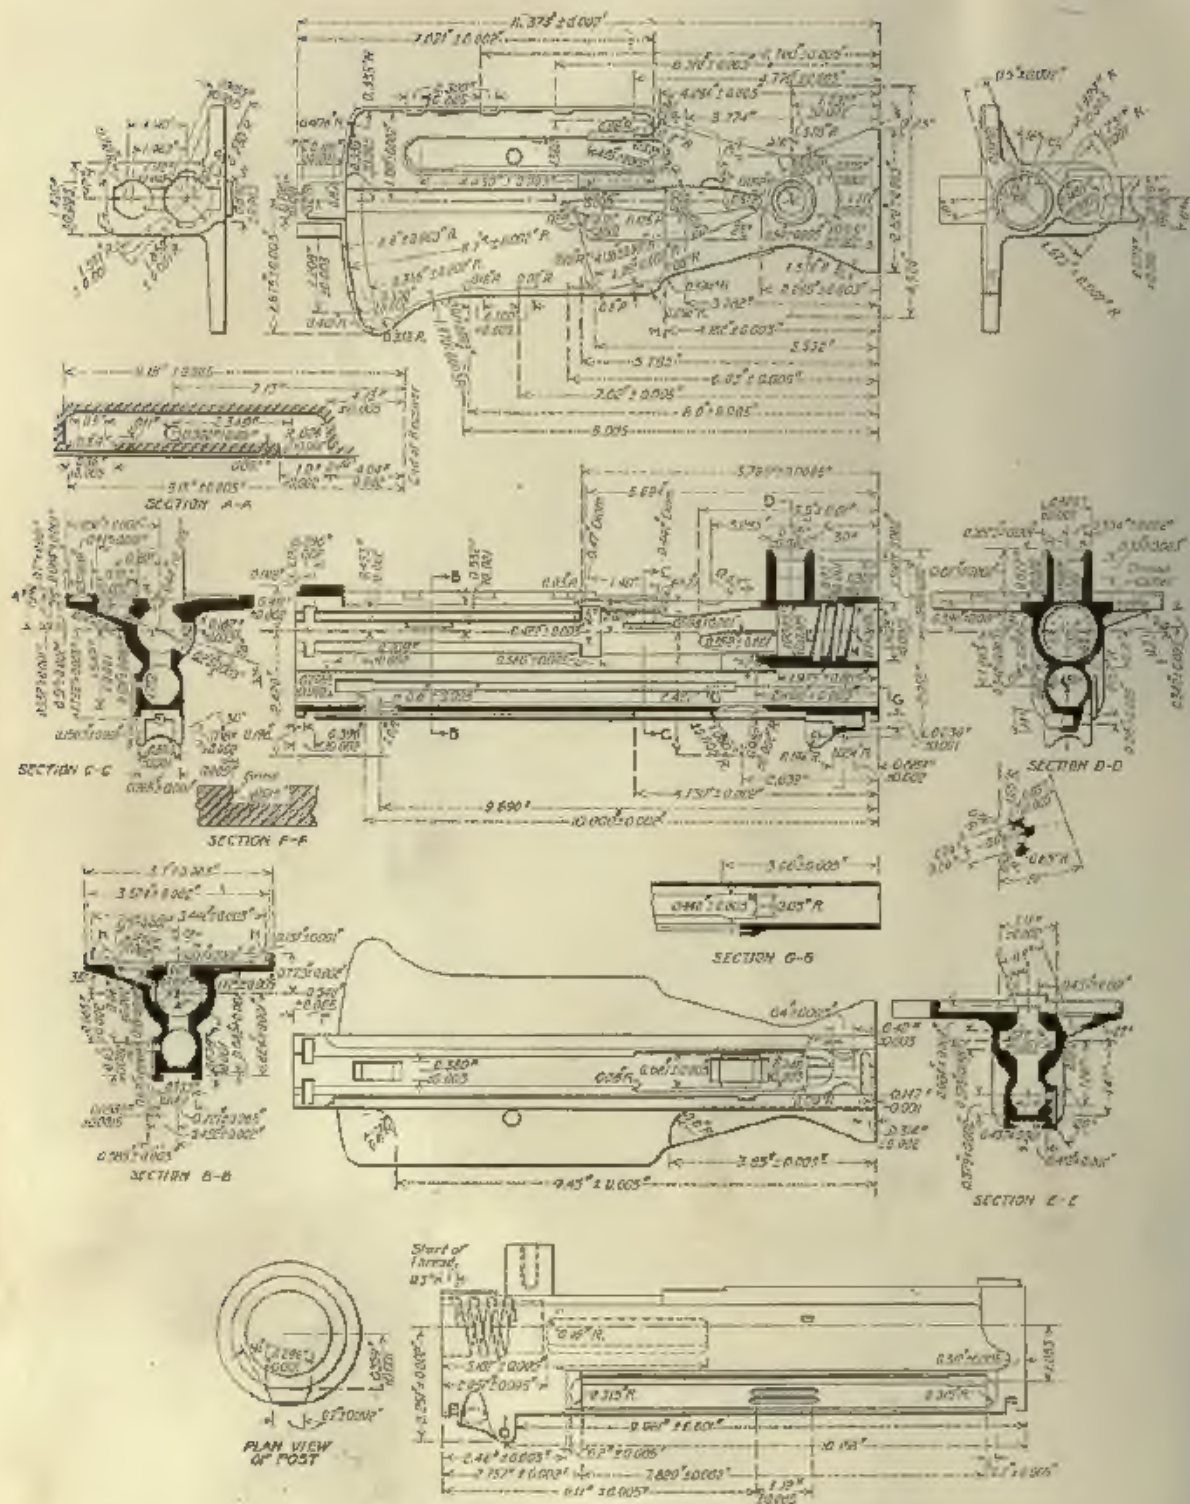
THE LEWIS GUN, SHOWING RECEIVER AND OTHER PARTS
